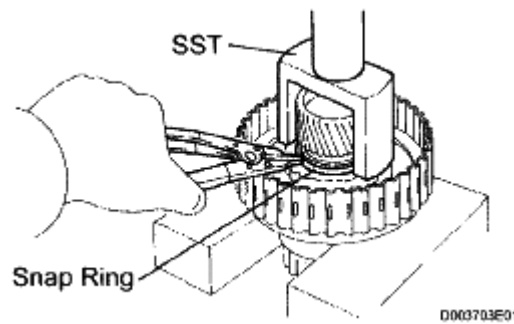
Installing Snap Ring To Underdrive Clutch Drum
